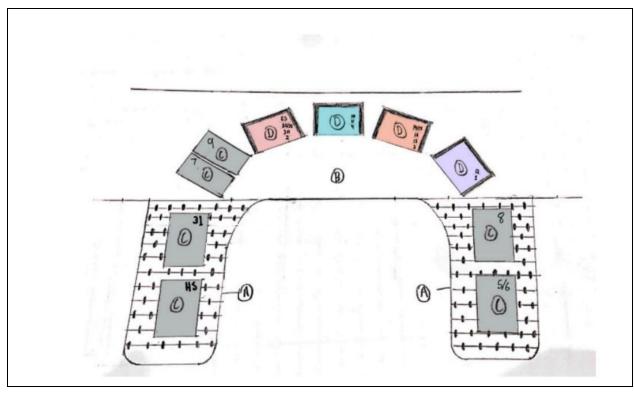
Top and front view for the workstation redesign (video : toaster cage assembly v1)
